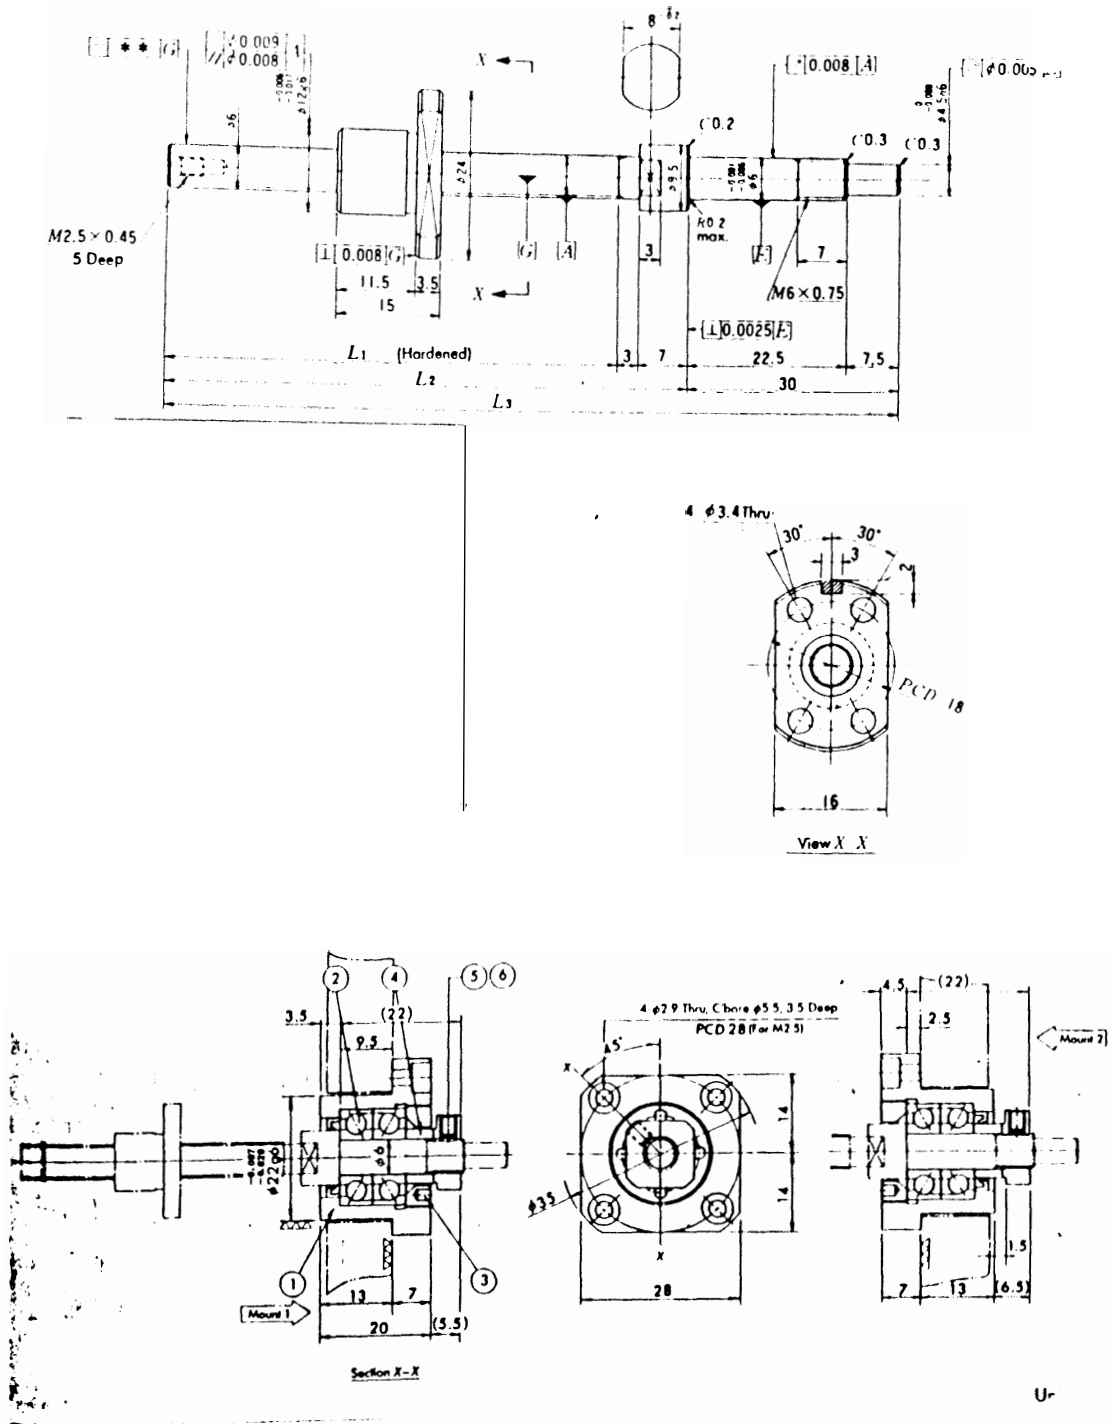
Ball screw assembly. (a) precision ball screw assembly
